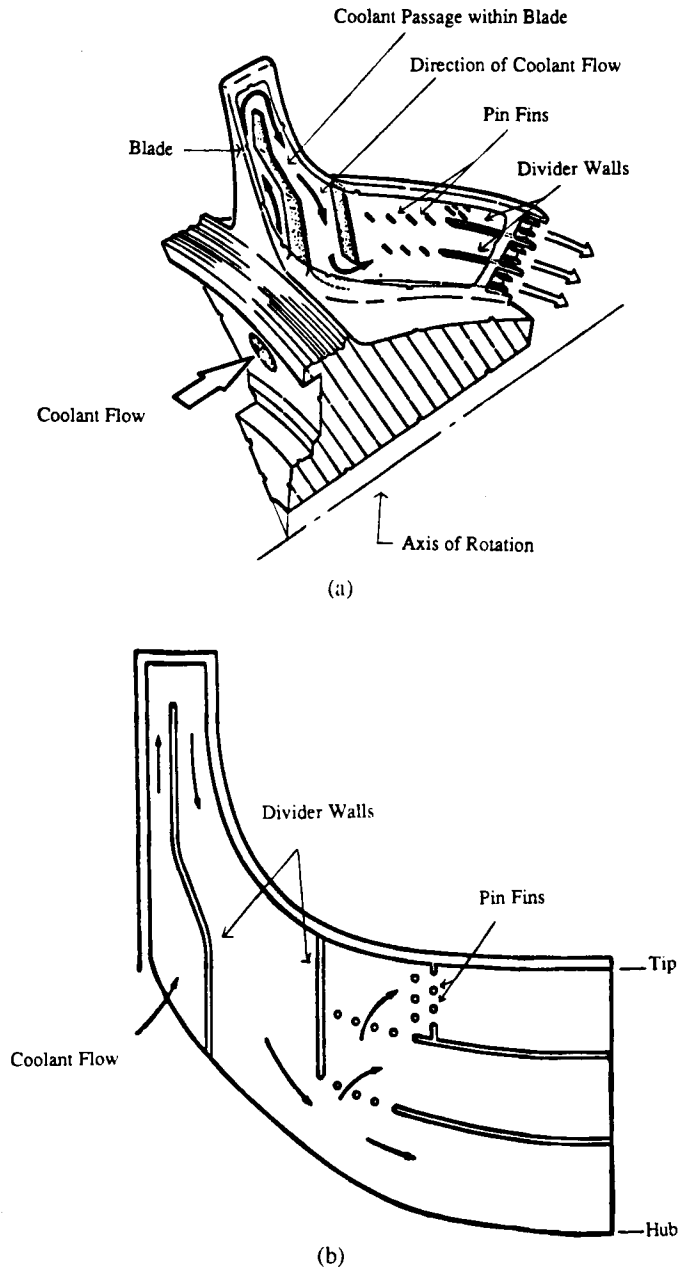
Coolant passage within a radial turbine blade: (a) cutout view; (b) schematic drawing
